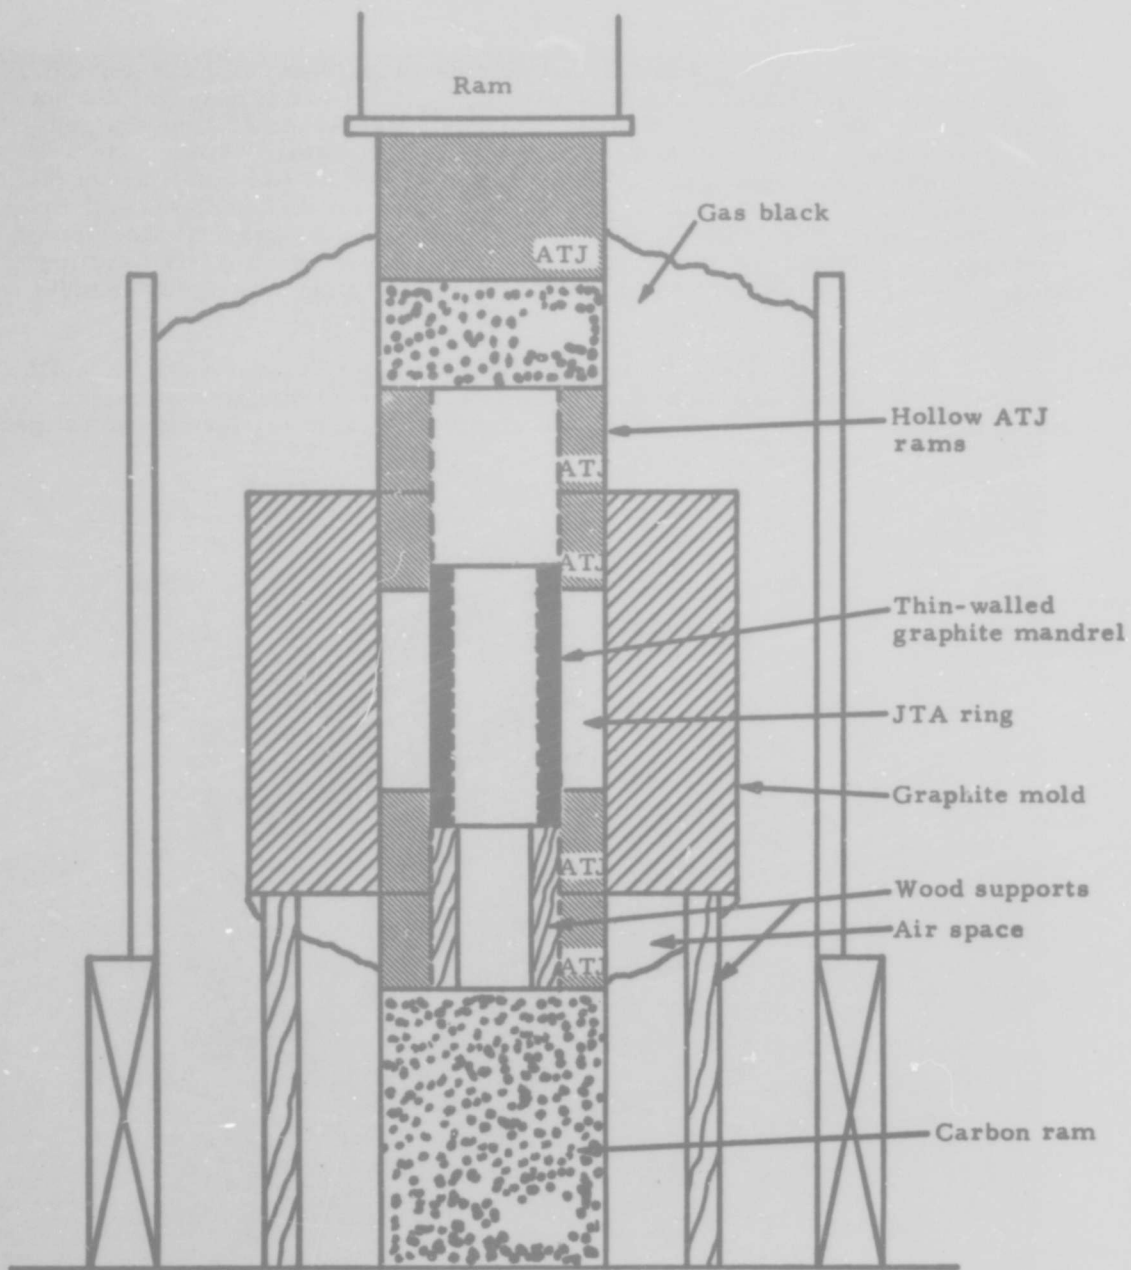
Hot-Pressing Assembly 14-in. Hollow JTA.
